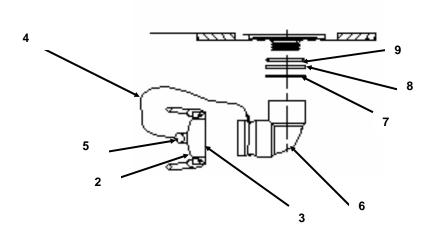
Berm Liner Drain Fitting Assembly (MPC Models)
